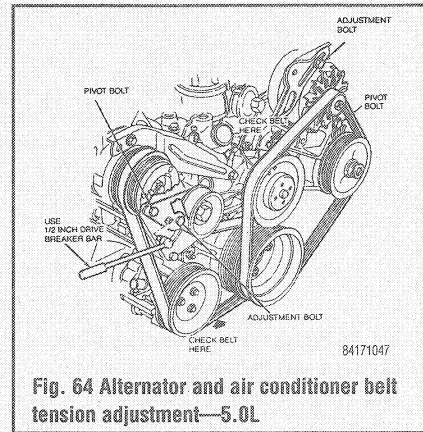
Alternator and air conditioner belt tension adjustment—5.0L
